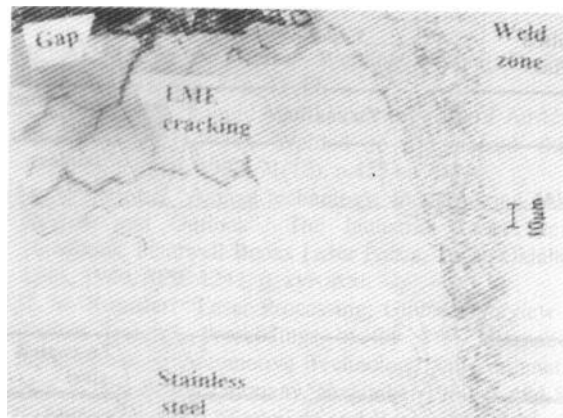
Typical example of optical micrograph of a cross section of lap welded joint produced using 0.05mm gap and 15 l/min helium.
